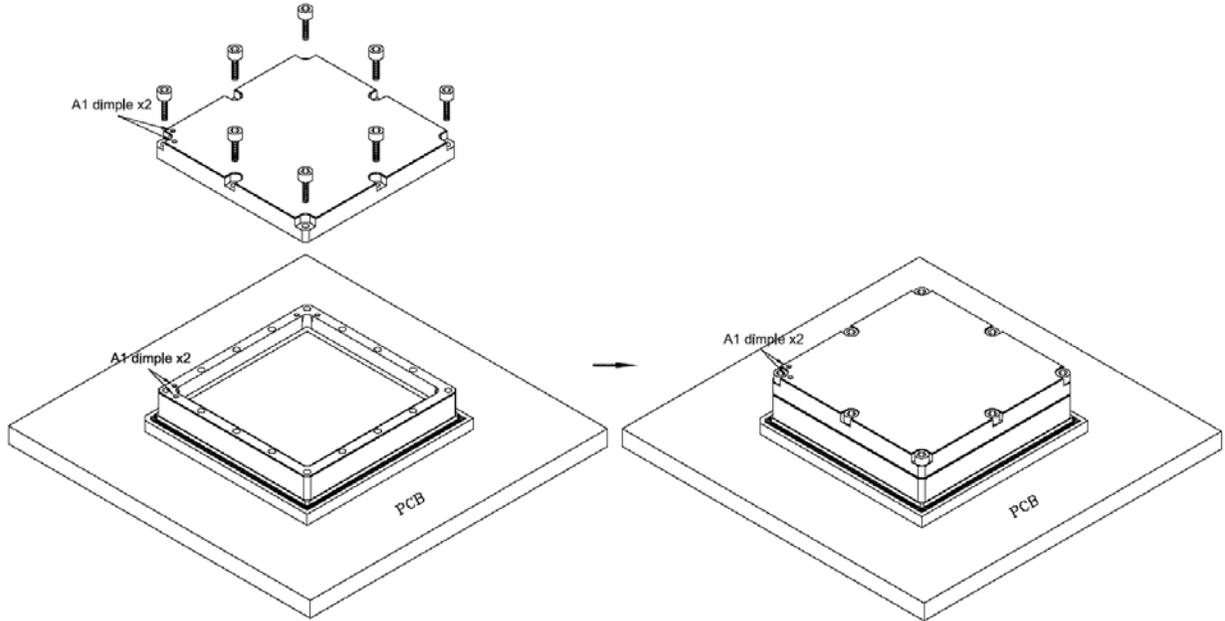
• Placing LG1272 Package into Adapter Assembly
